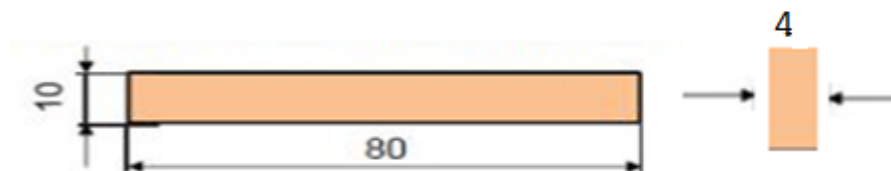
Charpy impact test on an unnotched specimen and the dimension in mm
